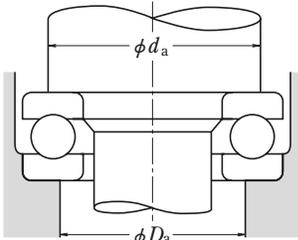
Face-Supporting Diameters for Thrust Ball Bearings
